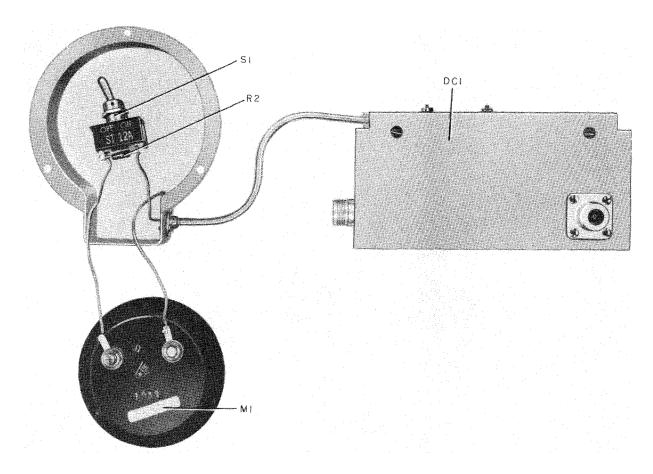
Directional Coupler DC1 and Meter Case Assembly, Location of Parts
